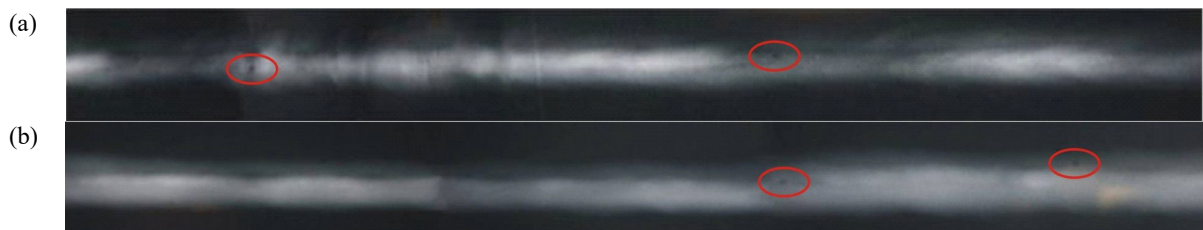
Radiograms of plate butt joint made with the use of: (a) MMA and (b) MAG welding. In figure areas of welding imperfections occurrence were marked
